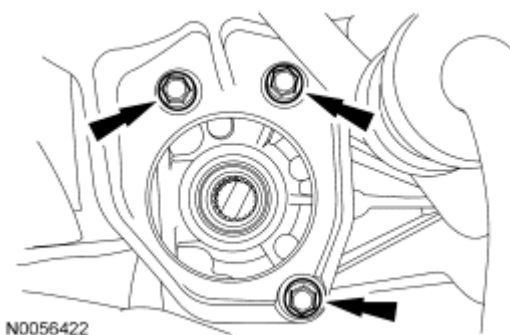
Locating RH Side Insulator Bracket-To-Rear Axle Differential Bolts
